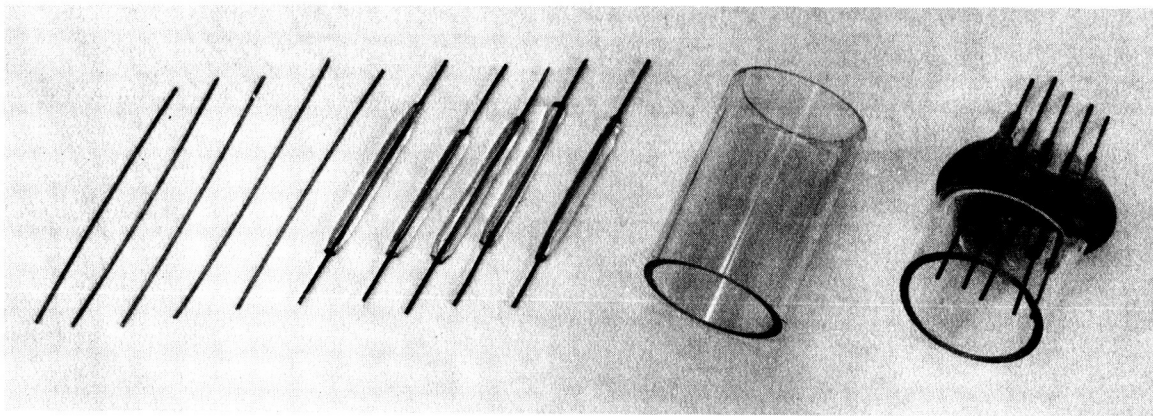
Fabrication of uranium glass-tungsten graded glass seals. Left to right: tungsten pins; tungsten pins with vacuum drawn uranium glass sheaths; uranium glass tube; tungsten conductor pins for embedded electrode and thermocouples sealed in test chamber cap.
